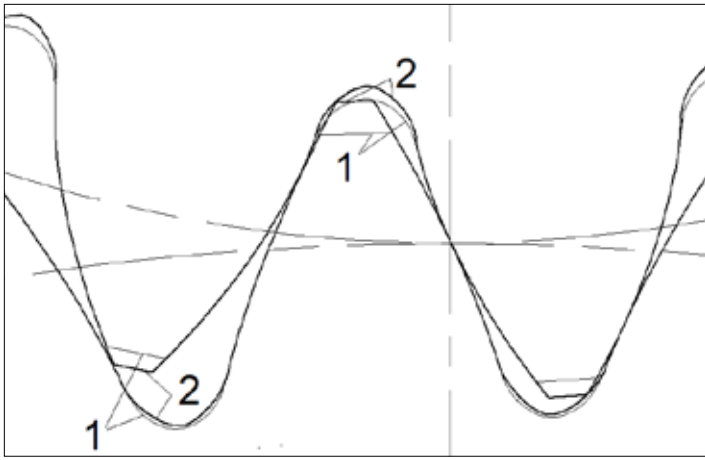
Gear pair comparison overlay; 1 – (thin lines) traditionally designed gear tooth profiles, 2 – (thick lines) directly designed gear tooth profiles
